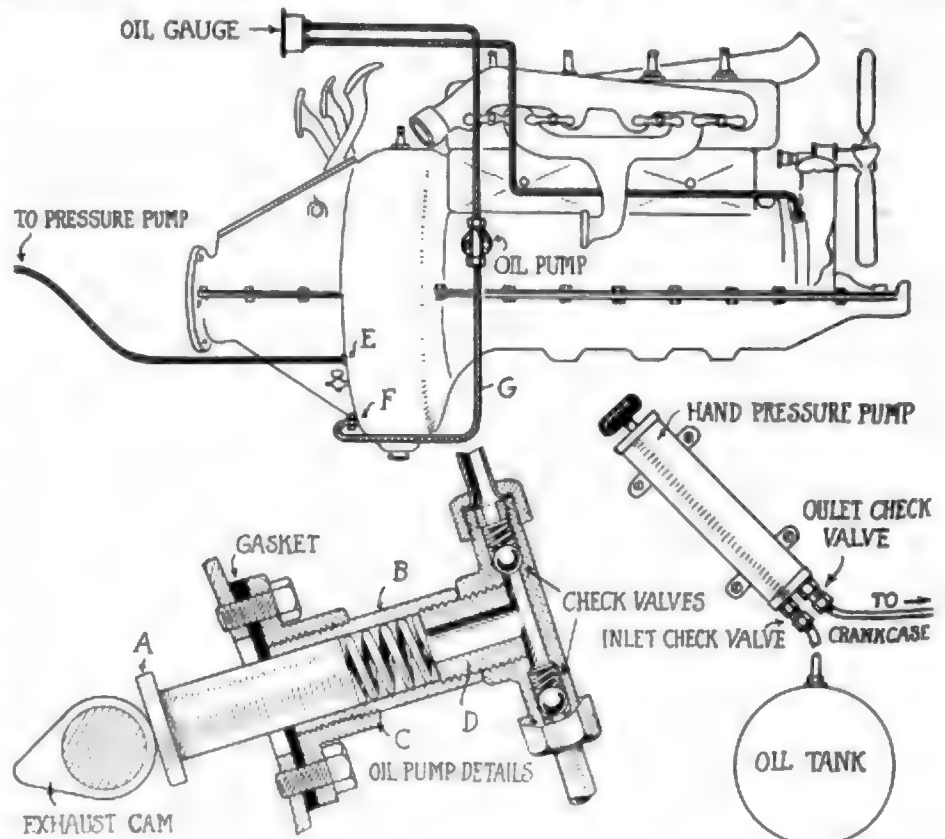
Oiling system as auxiliary unit for Ford engine. Such a system is necessary for high-speed work
